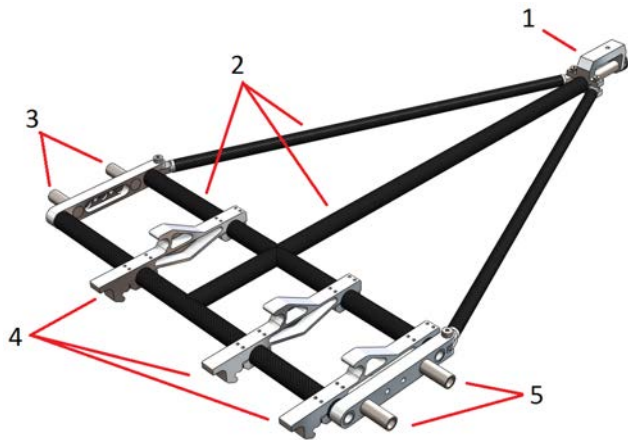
Main support frame constructed of carbon fiber tube and aluminum mounting inserts providing attachment points to the tripod and rockers (1) Rear rocker hinge (2) Carbon fiber tubes (3) Front right rocker four bar linkage hinges (4) Arm attachment structure (5) Front left rocker four bar linkage hinges
